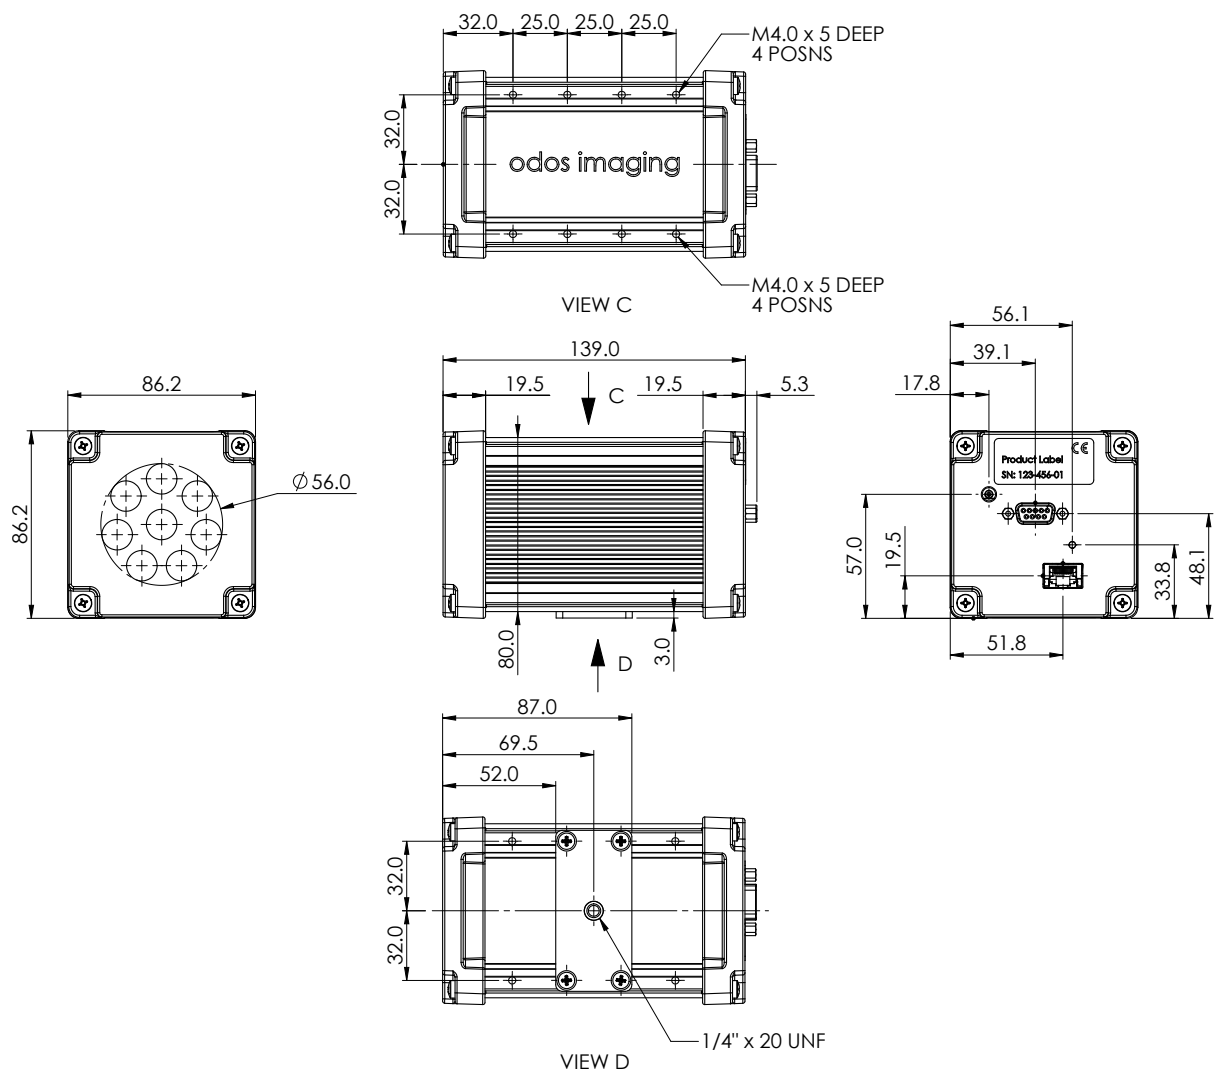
Mechanical dimensions of the base StarForm Swift™ camera model fitted with optional tripod mount plate.
